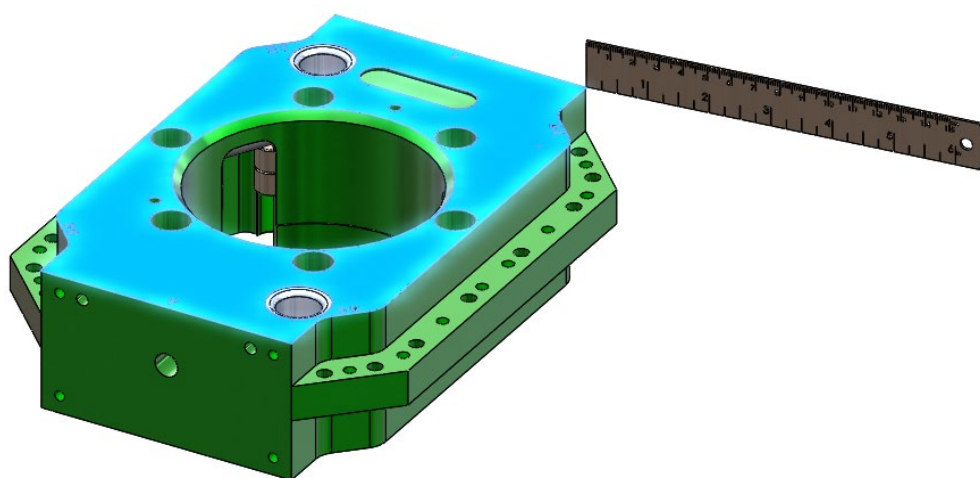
Tool Side – Raised Material Inspection
